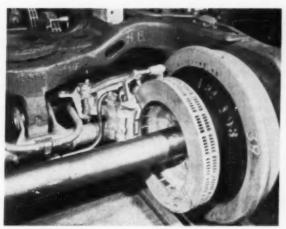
The standard "CF" Budd disk brake used with the "Tubular Train" brake equipment showing the assembly on the axle mounted inboard of the wheel. A complete carriage is shown in Fig. 5.
